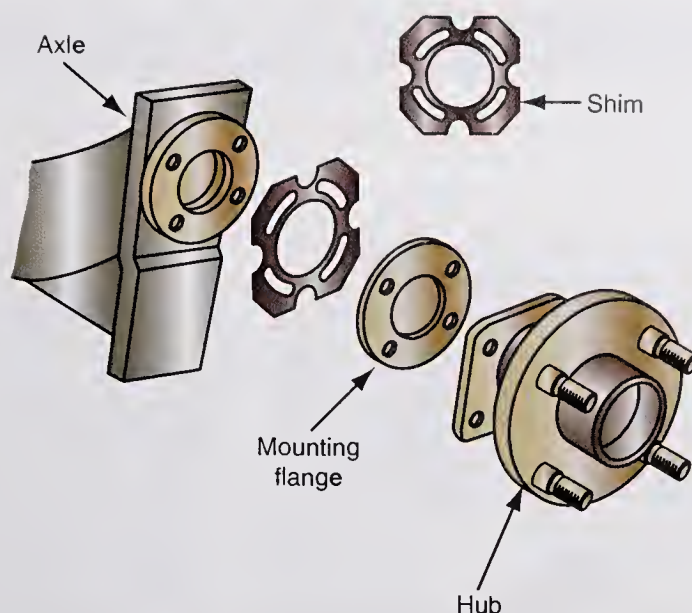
Adjusting rear wheel toe by changing shim thickness between rear spindle and mounting flange.
